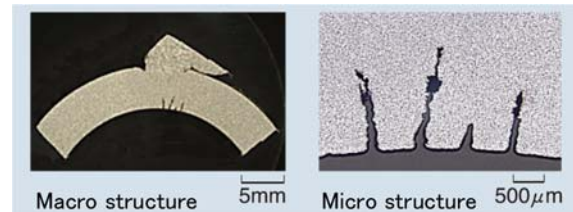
Example of Corrosion Fatigue Cracks
